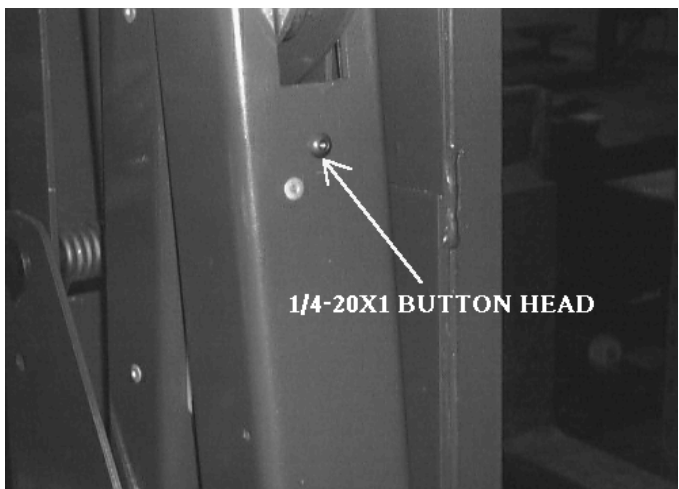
LOCATION OF 1/4-20X1 BUTTON HEAD
